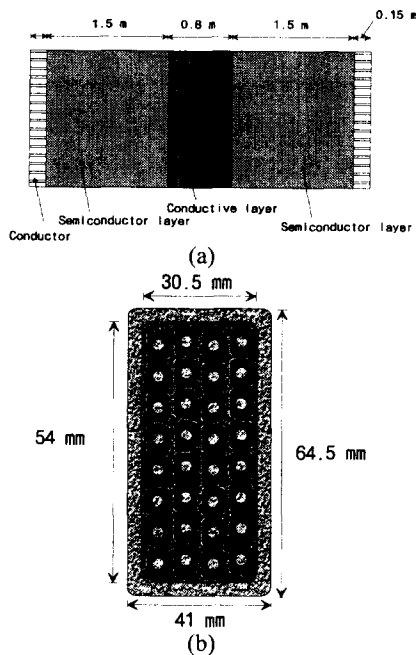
The dimensions of stator winding used by testing made as follows:
